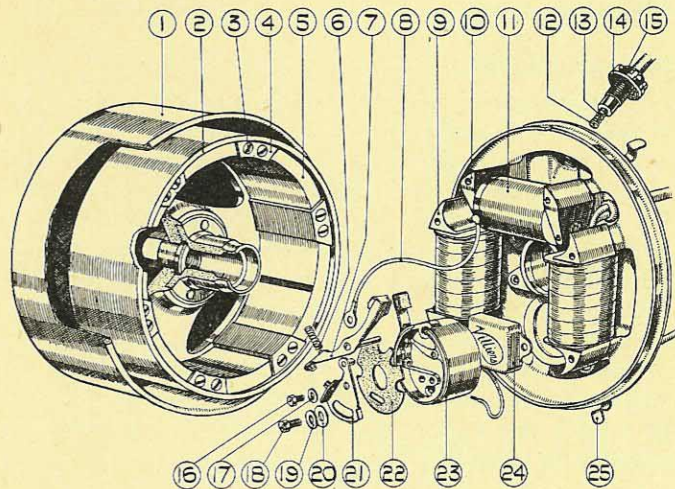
EXPLODED DRAWING OF MAGNETO MARK 10D AND MARK 6E UNITS.
